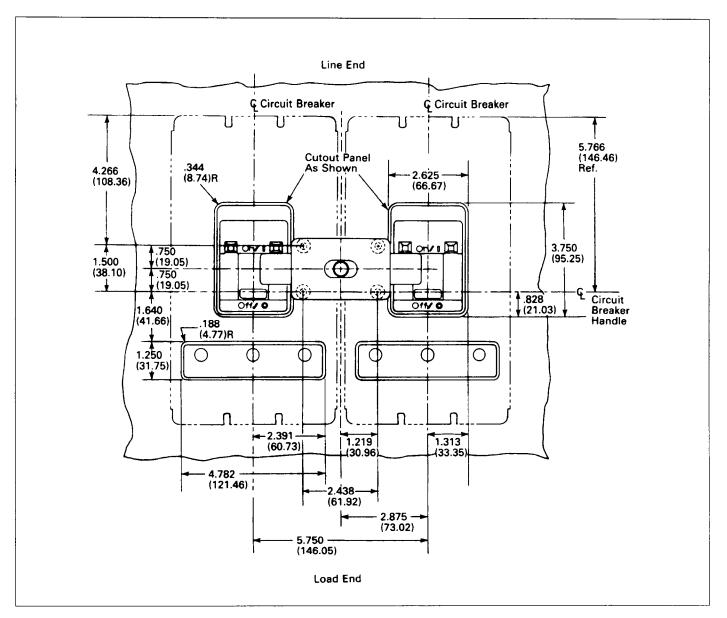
K-Frame Sliding Bar Interlock Installation Details
